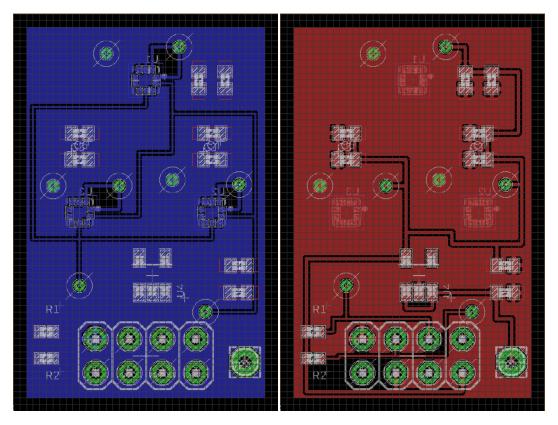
The bottom layer (left) and top layer (right) of the mouthpiece PCB
